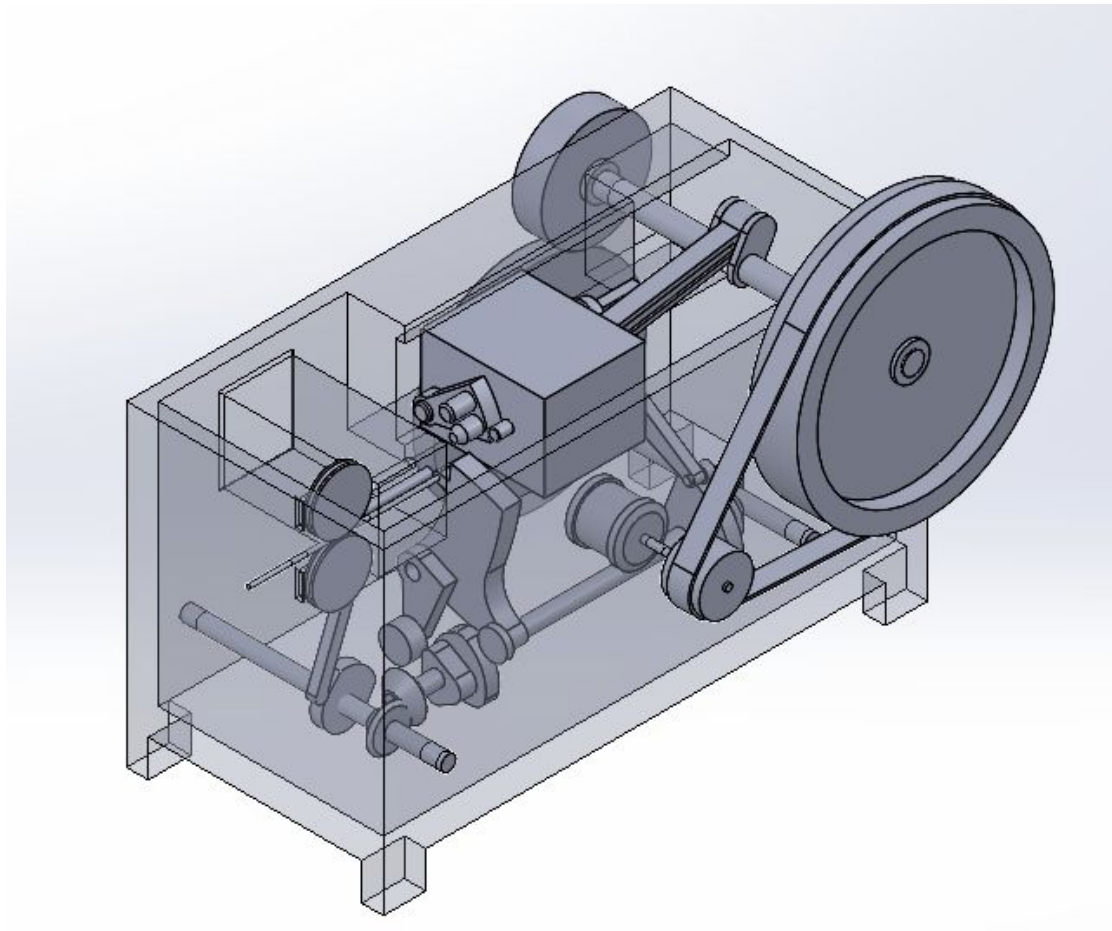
SolidWorks CAD Rendering of Cold Forging Header
